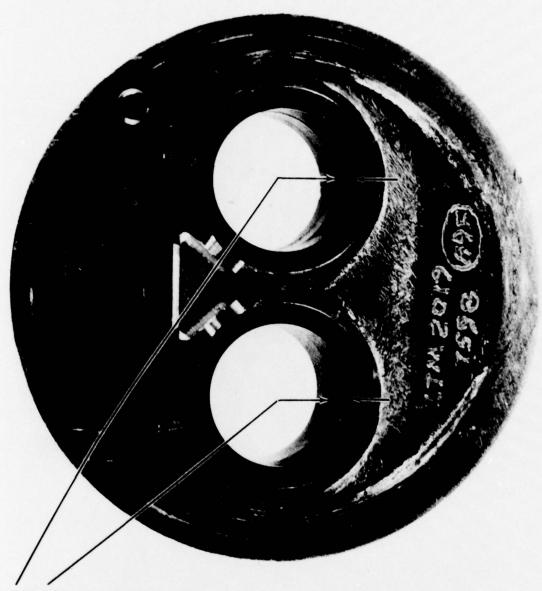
and 38 show the aluminum sleeves from the scavenge pump and supply pump, respectively. The pitted area on the inlet side of the sleeve is not cavitation damage. These small holes were caused by silicon spheres in the oil. Oil analysis showed spherical beads less than 60 microns in diameter. An F100-PW-100 Bill-of-Material filter was used and will pass any material less than 70 microns. Both pumps displayed this damage but S/N 2 (40 hours run time) was worse than S/N 1 (20 hours run time). The origin of the glass beads is suspected to be due to incomplete flushing of interior tank parts after grit blasting prior to final assembly.
